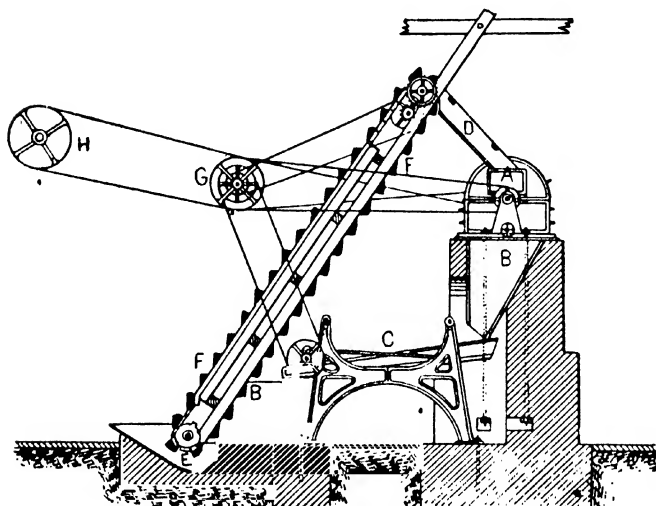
Carr's Disintegrator or Toothed Crusher. C, Sieve. F, Elevator G, H, Transmission Shafting.
